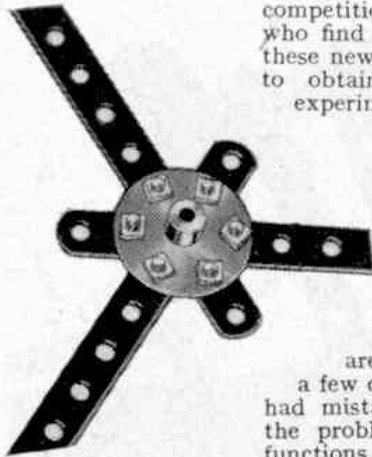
(Right) The new Bush Wheel, with six holes, (Part No. 24b), used to form the hub of a three-bladed helicopter rotor.
